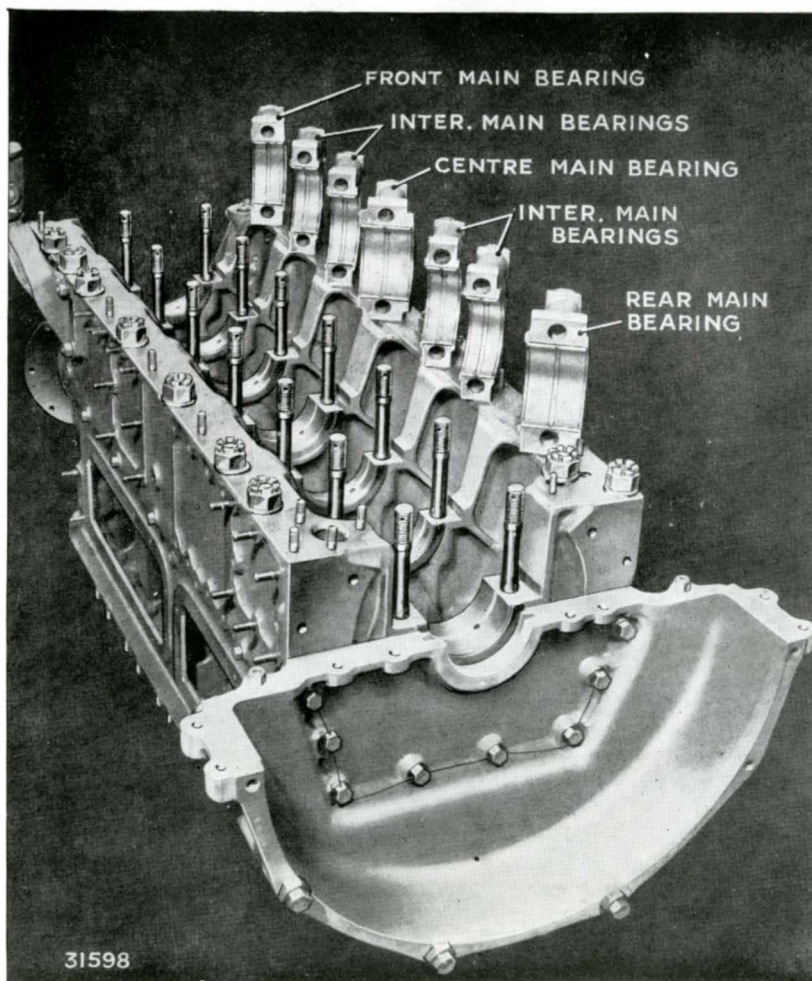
ENGINE BLOCK AND MAIN BEARINGS
